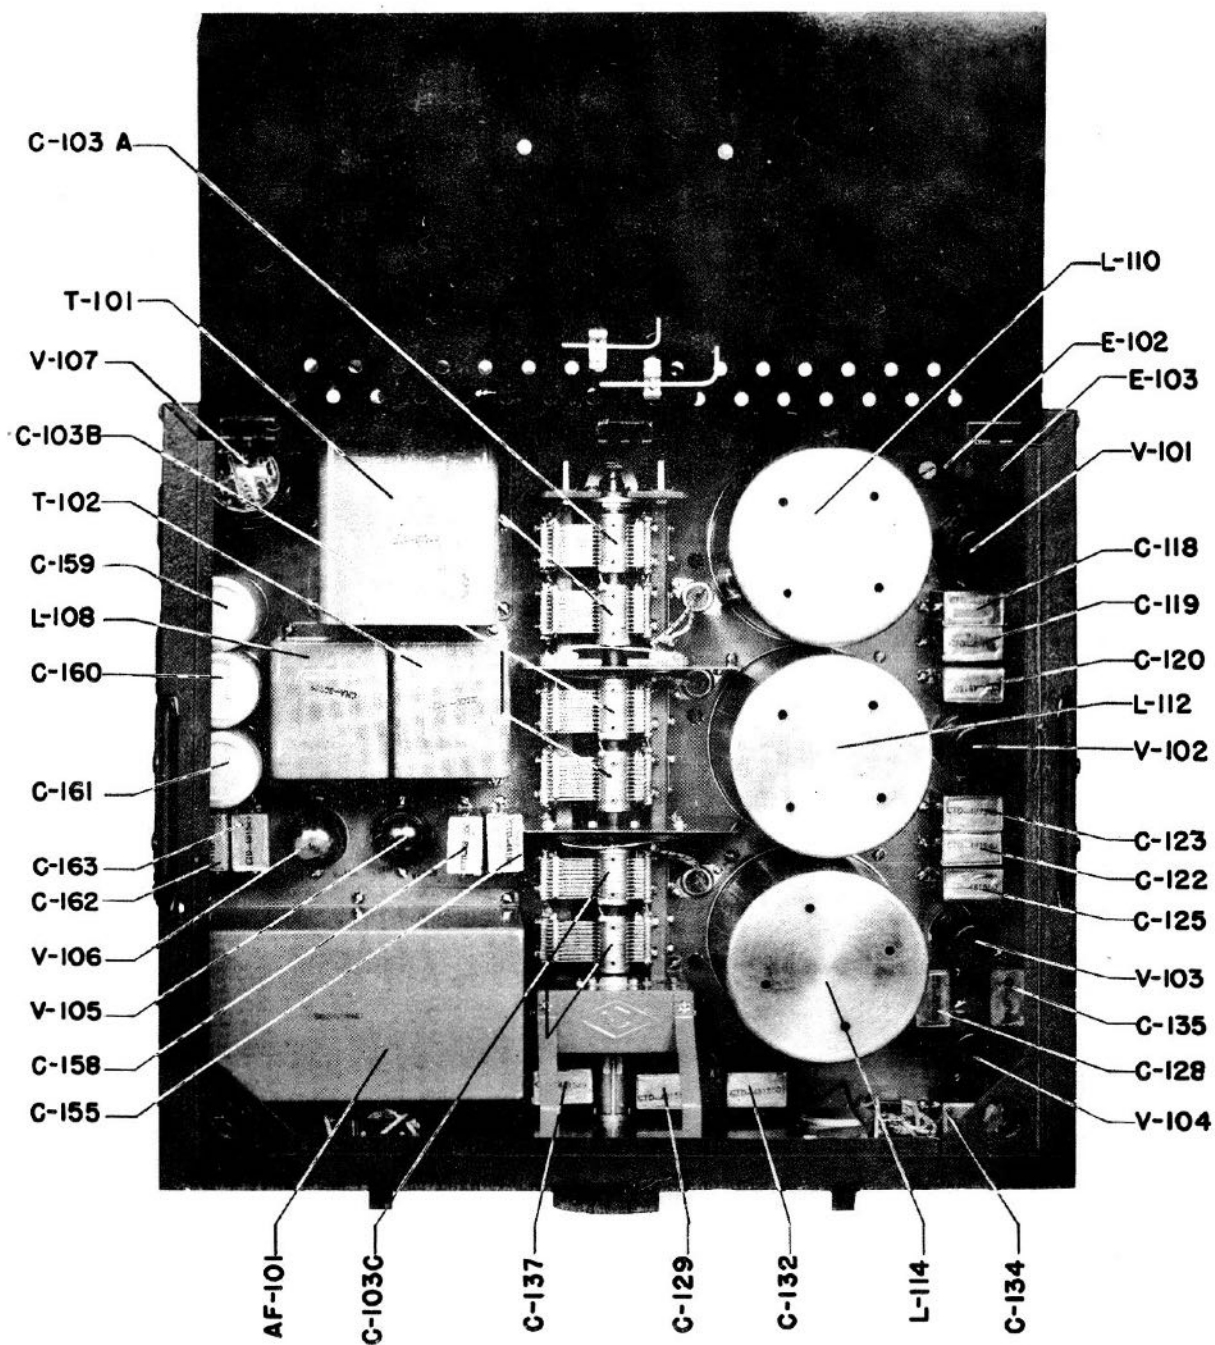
Top View of Type CNA-46161 Radio Receiver
